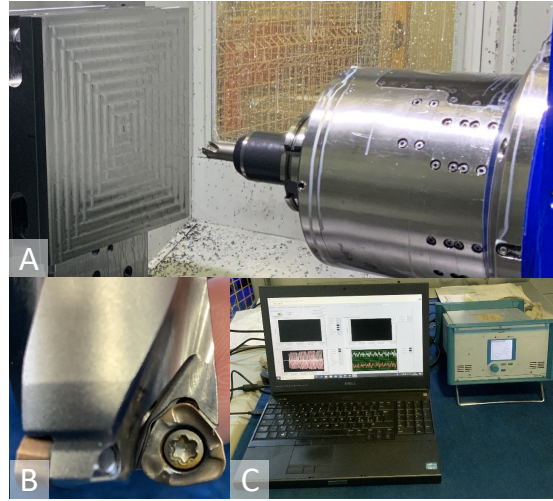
Experimental set-up: A) Ti_6Al_4V workpiece and mill; B) Mitsubishi high-feed mill; C) DAQ.
